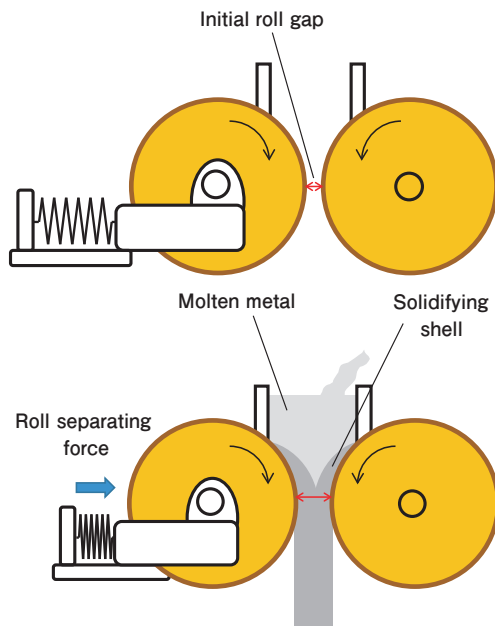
Schematic of vertical-type high-speed twin-roll casting machine and casting process
